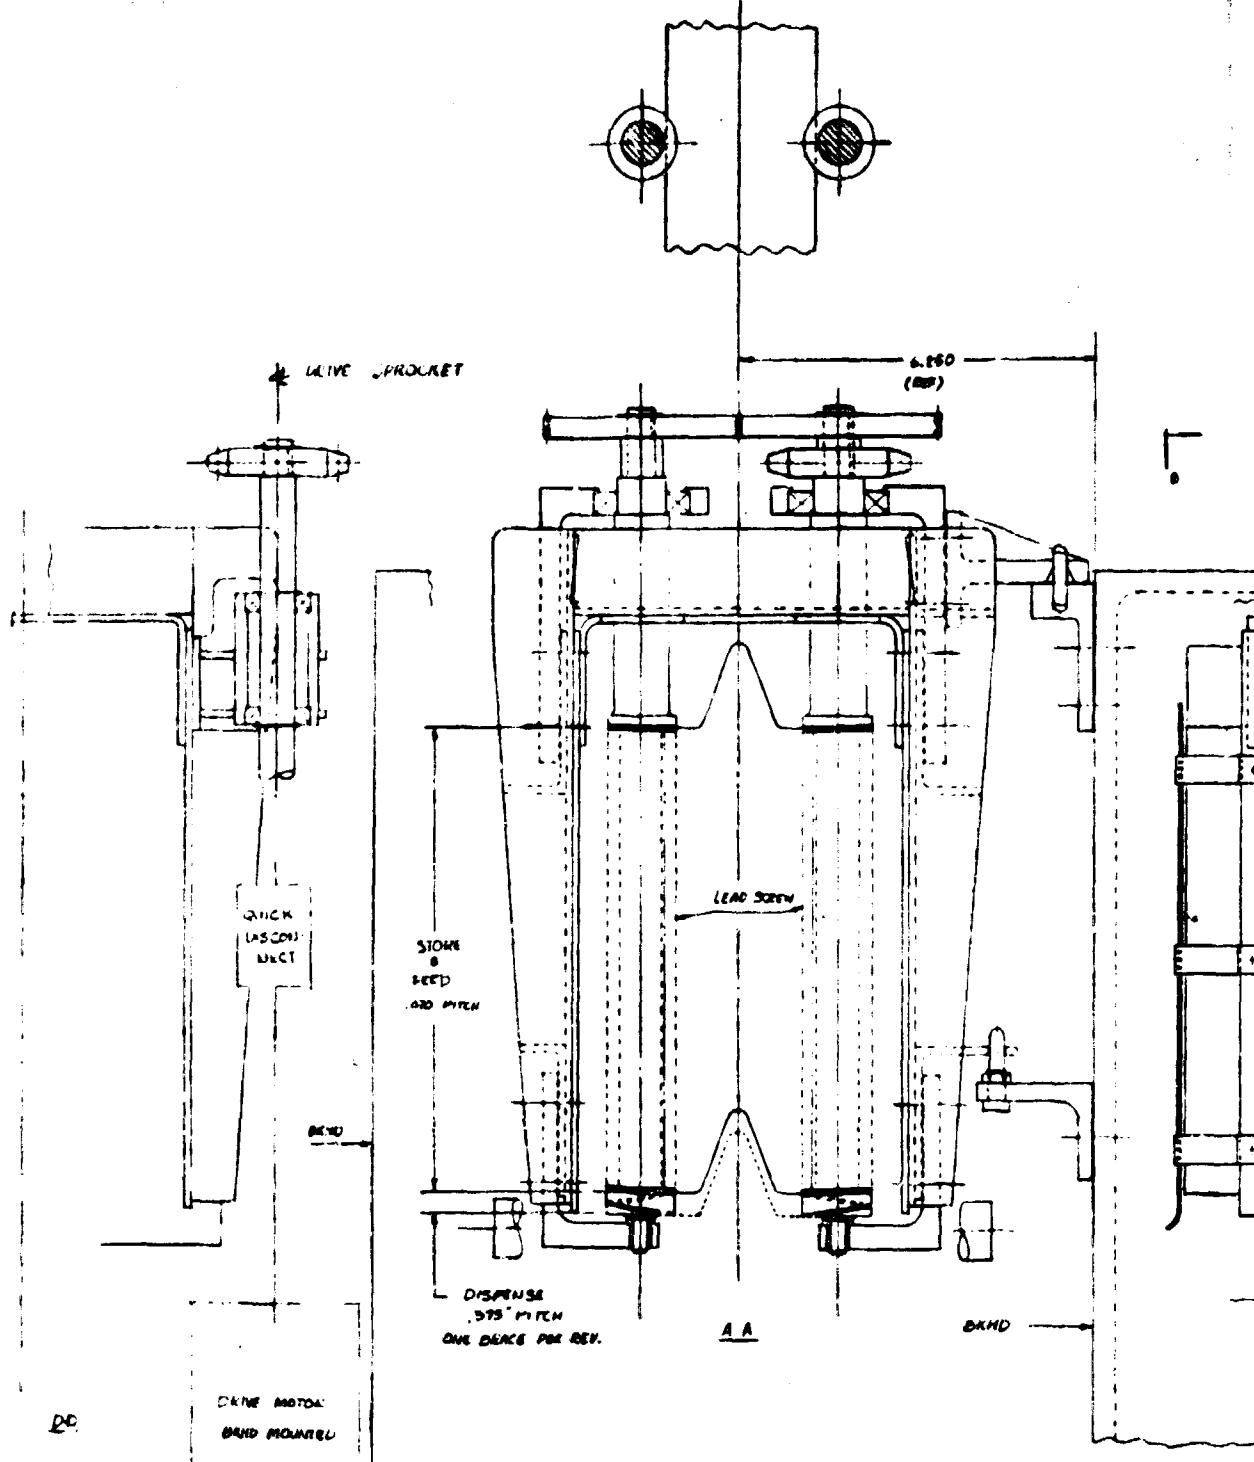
SFDS Clamp/Weld Block Detail Parts
